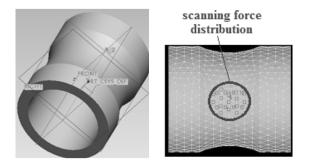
Example of 3D model reconstruction, meshing and loads distribution for a radial ball bearing inner ring, small dimension
